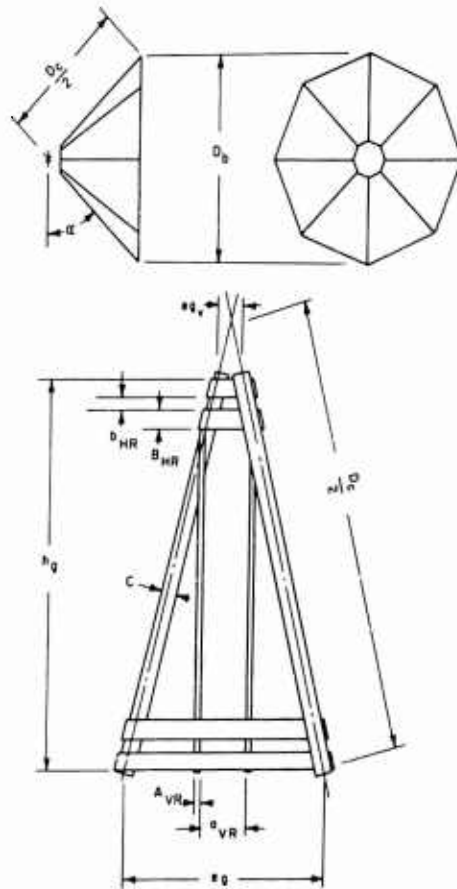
Typical Geometry and Gore Layout - Conical Ribbon Parachute
